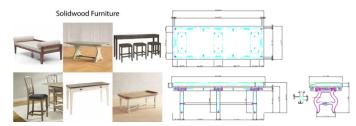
Types of solid wood furniture & Complex solid wood furniture computer drawing (orthogonal view only, not included parts drawing)
